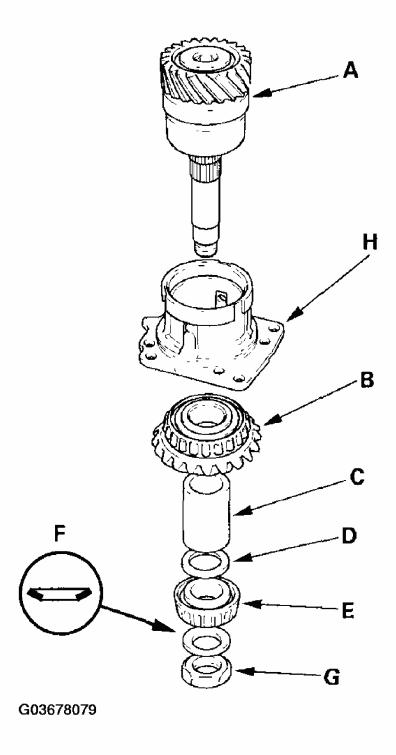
Installing Transfer Shaft Assembly, Transfer Drive Gear, Transfer Shaft Collar, 25mm Thrust Shim, Tapered Roller Bearing, Conical Spring Washer, And Locknut In Transfer Holder Courtesy of AMERICAN HONDA MOTOR CO., INC.
